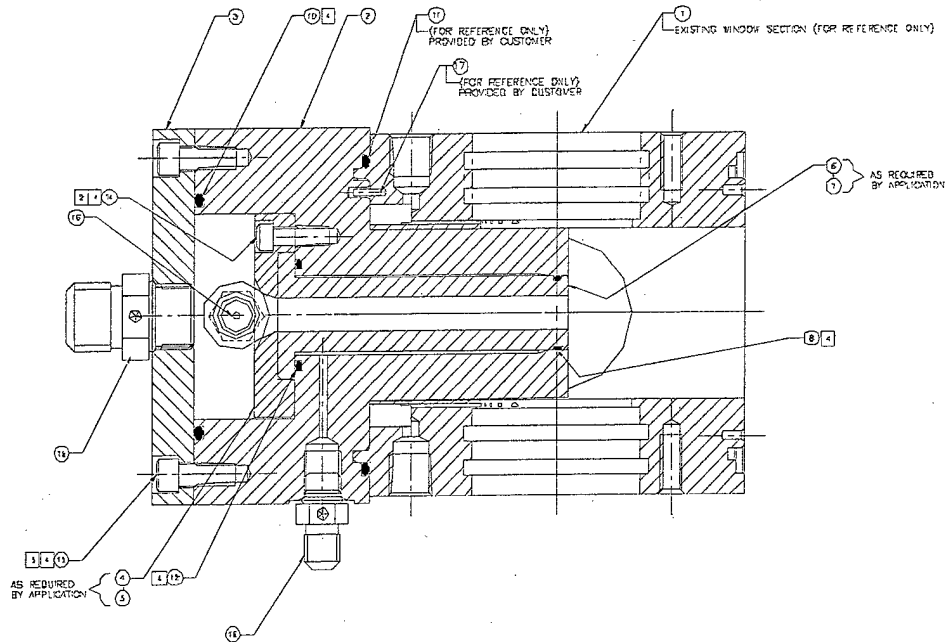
Detail of Sierra Uni-Element Test Injector Assembly
